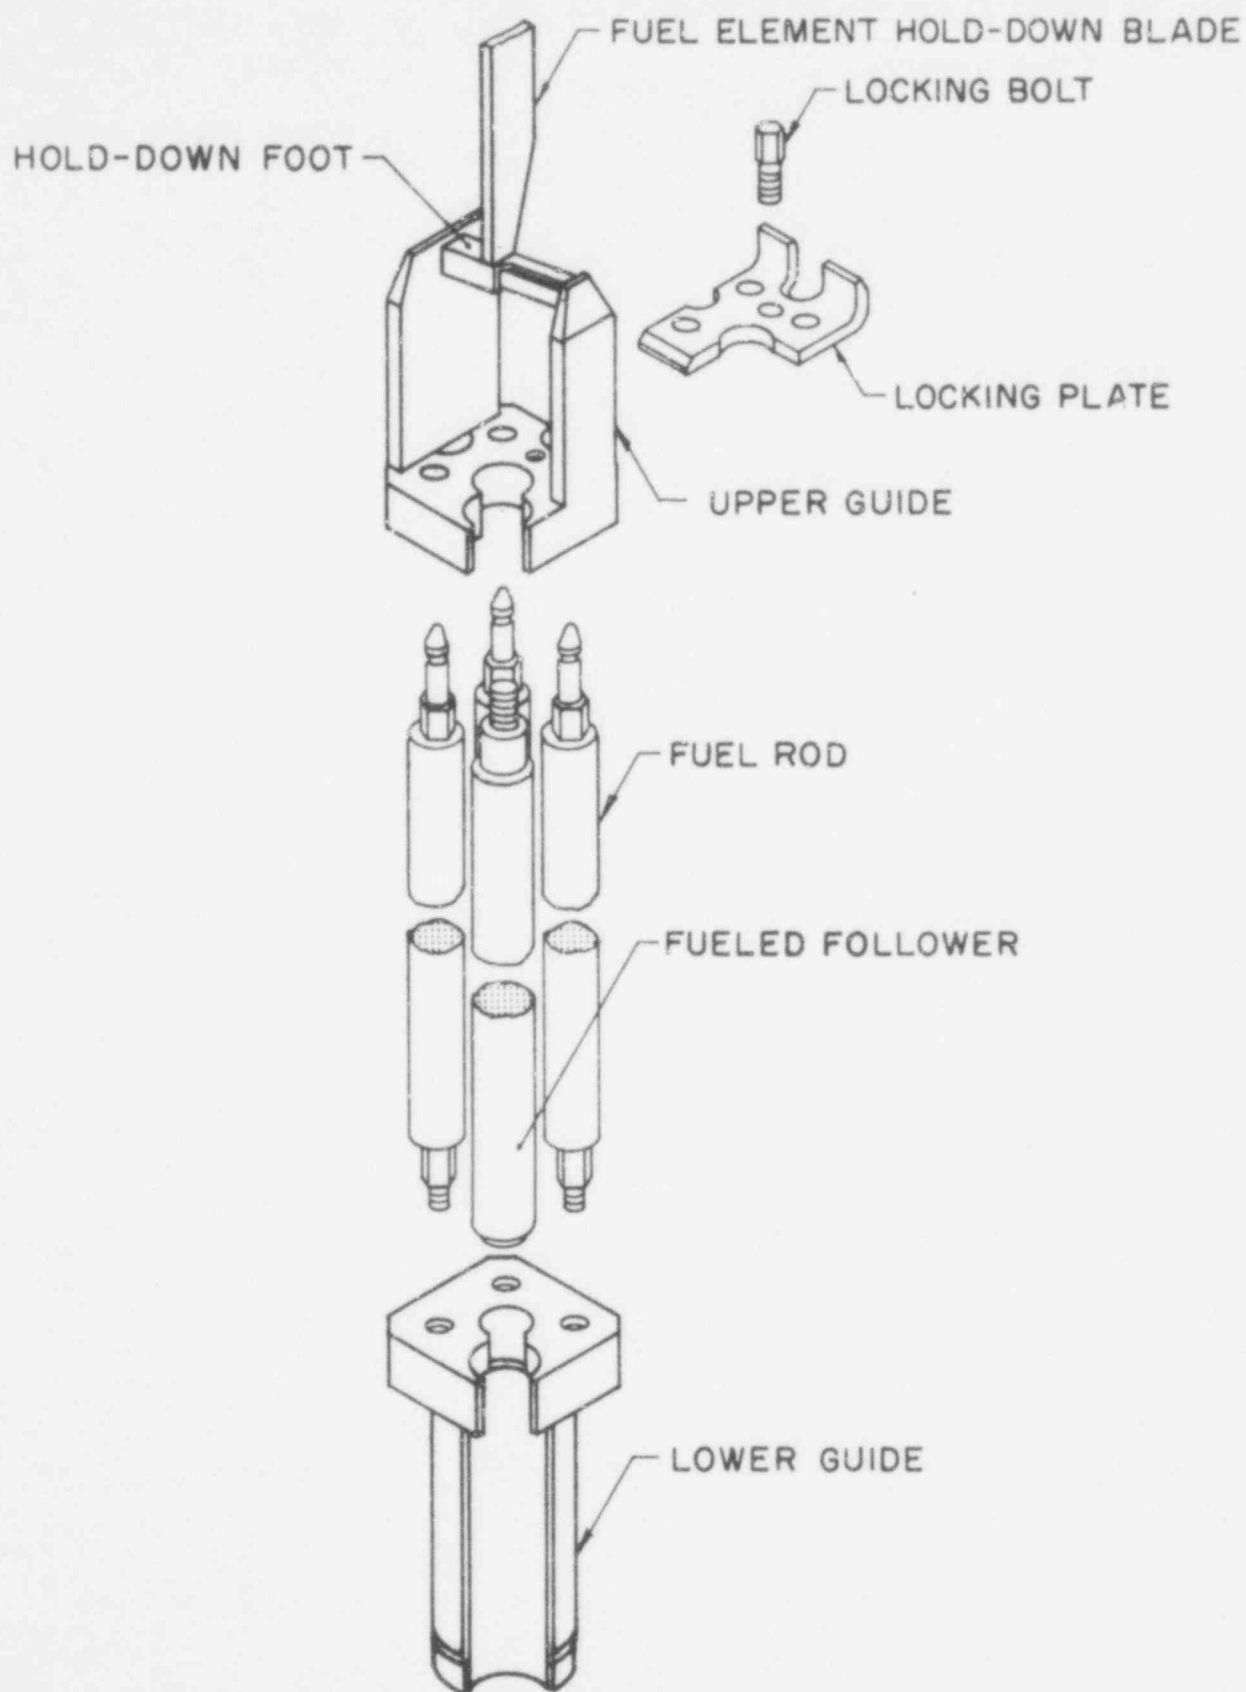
FUELED FOLLOWER-FUEL BUNDLE ASSEMBLY
